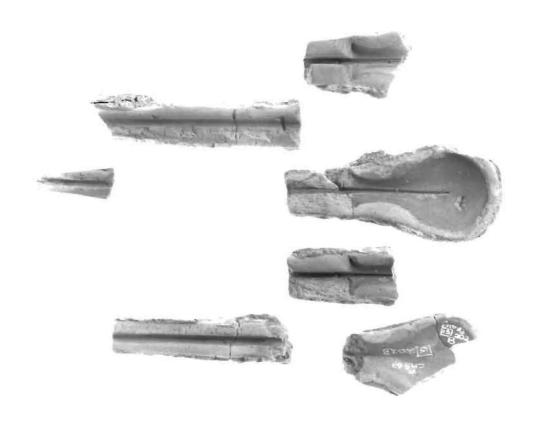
A selection of fragments of spoon mould back valves. Note the bowl fragment in the bottom right corner of the plate which is an example of the "non-ribbed" type.
